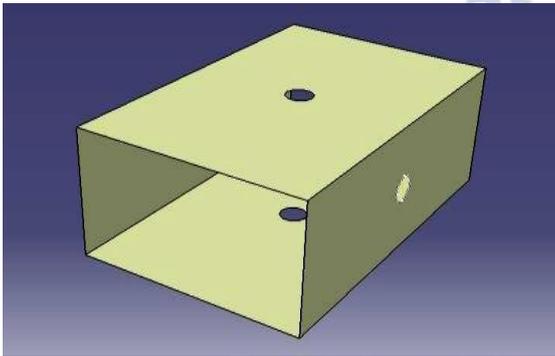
Crash Tube CAD model (Test no. 4)
